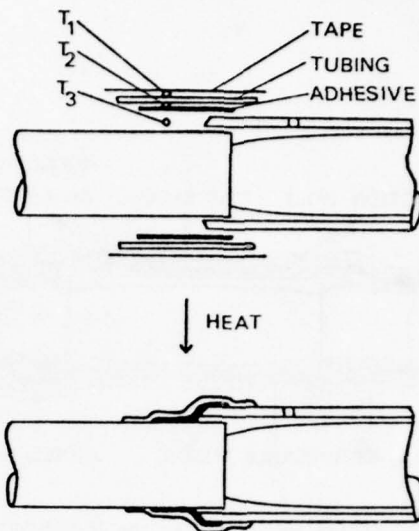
Heat-shrinkable tubing method for sleeve-cable jointing.
